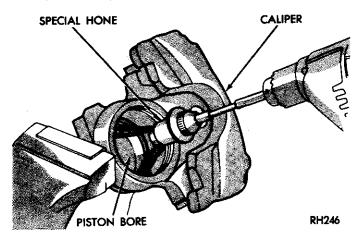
Lightly Polishing Piston Bore With Tool C-4095
